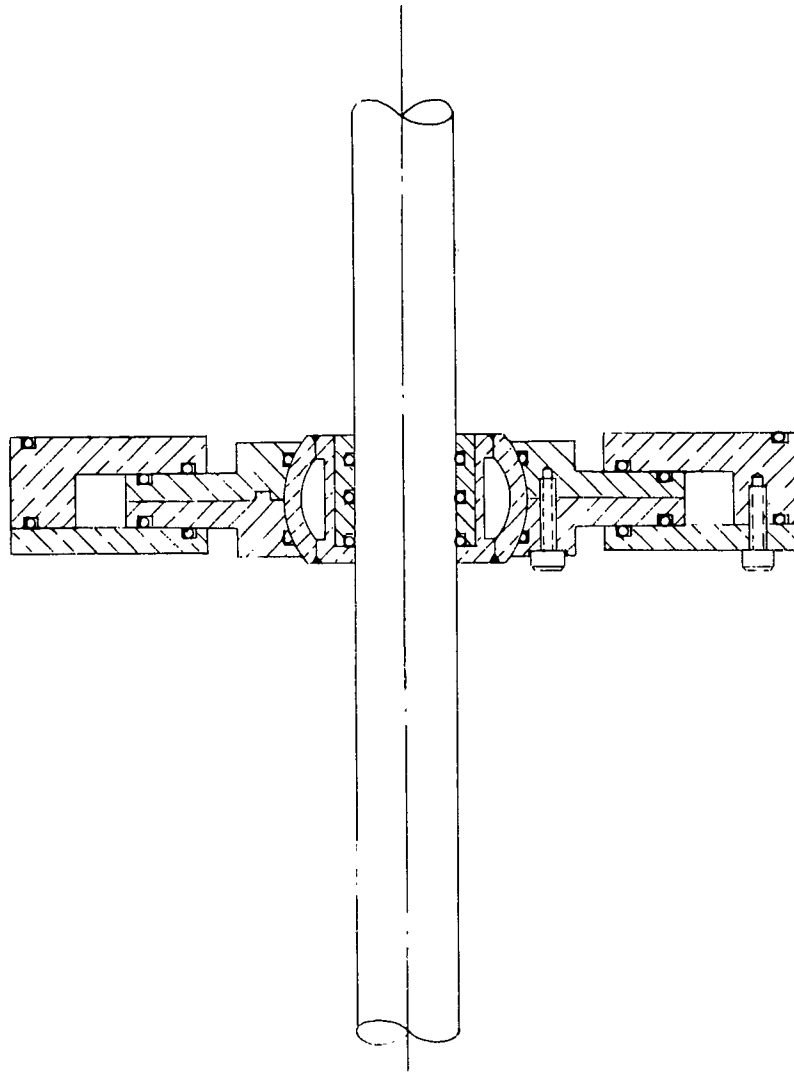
Reciprocating Shaft Seal (Ref. 18)
